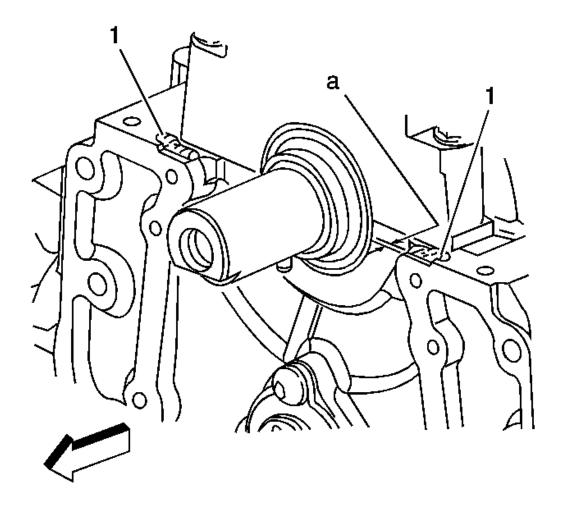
Applying Sealant At 2 Places On Engine Block Courtesy of GENERAL MOTORS CORP.
